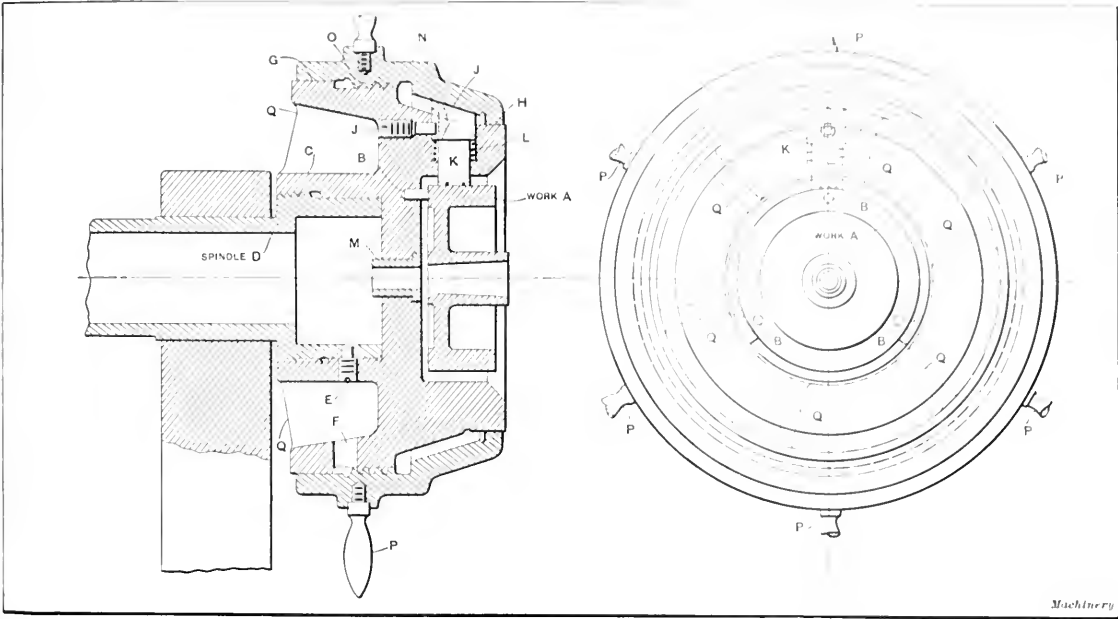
Special Type of Chuck with Clamping Pins for a Small Flywheel Casting
